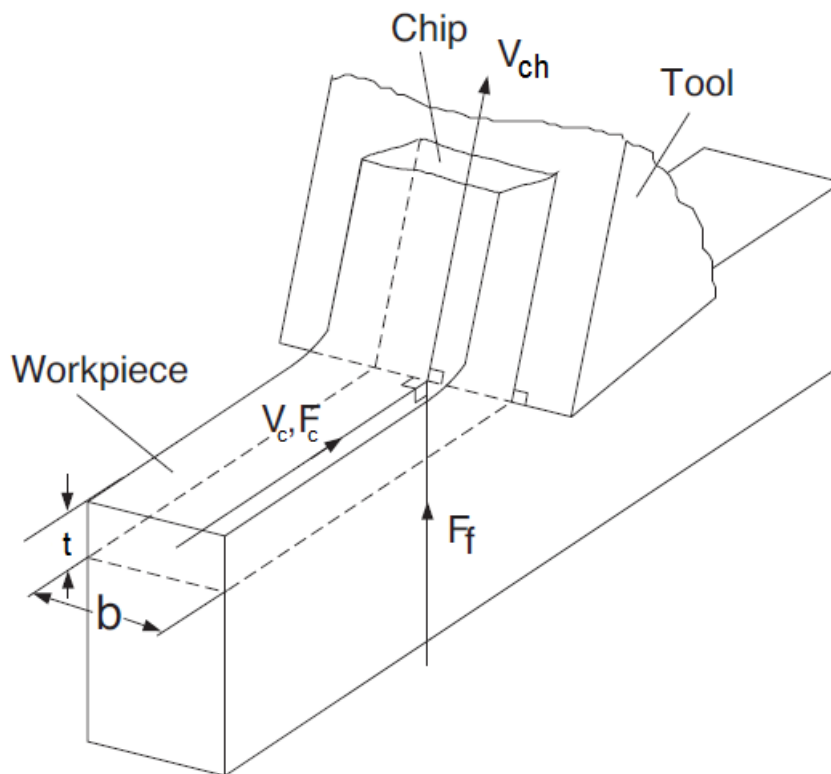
Orthogonal cutting geometry scheme [2]
